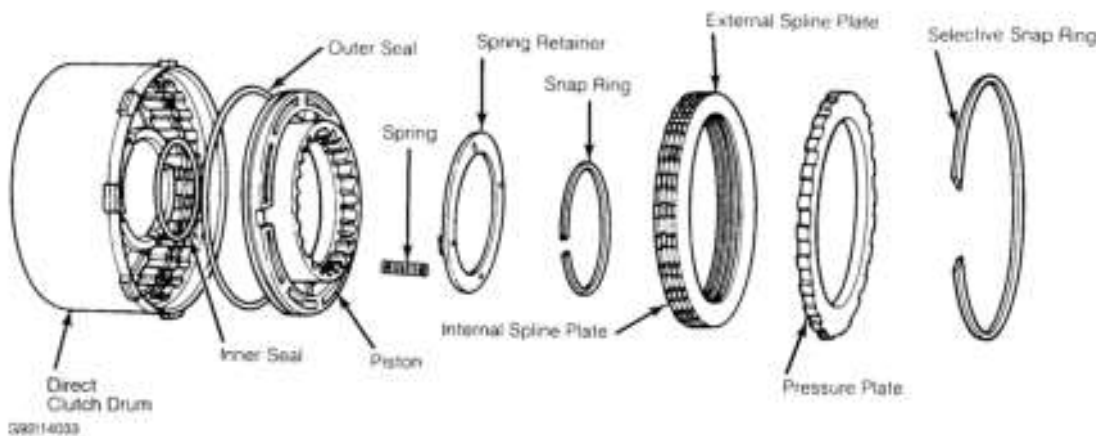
Exploded View of Reverse-High Clutch Assembly
